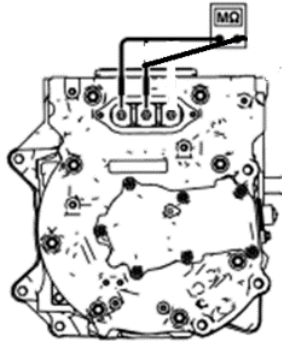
Measuring phase-to-phase resistance of traction motor stator windings using a milliohm meter
